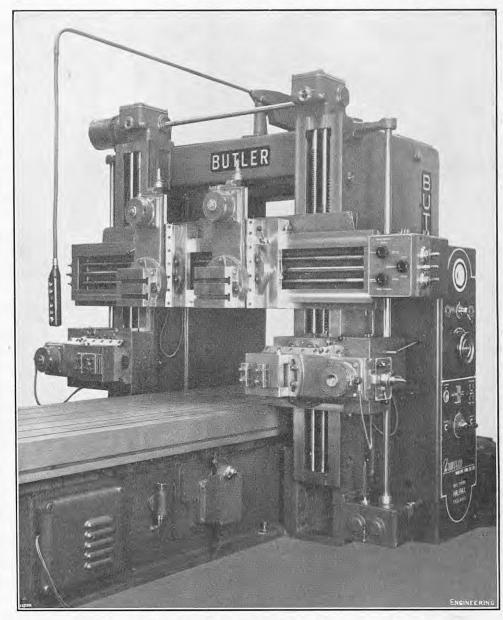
SPIRAL-ELECTRIC PLANER: BUTLER MACHINE TOOL CO., LTD.
